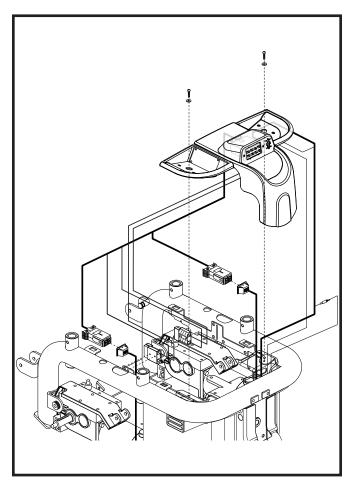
Jazzy 1121 ElectronicsTray Assembly/ Disassembly
